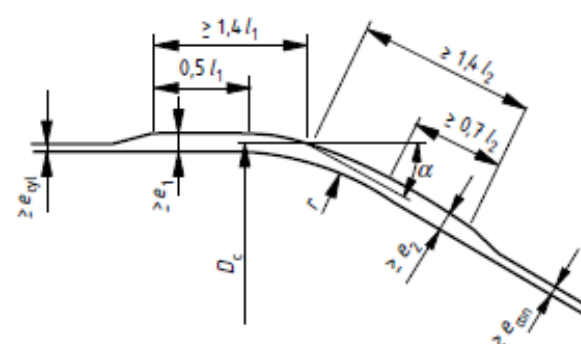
Geometry of cone/cylinder intersection with knuckle — Large end
